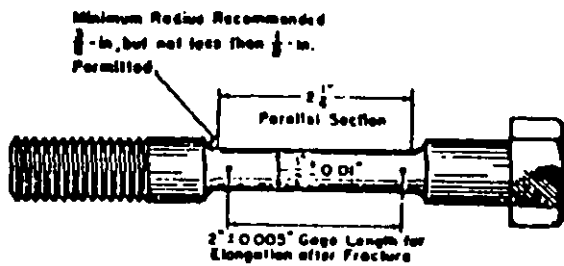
Tension-test specimen for screw with turned-down shank.
